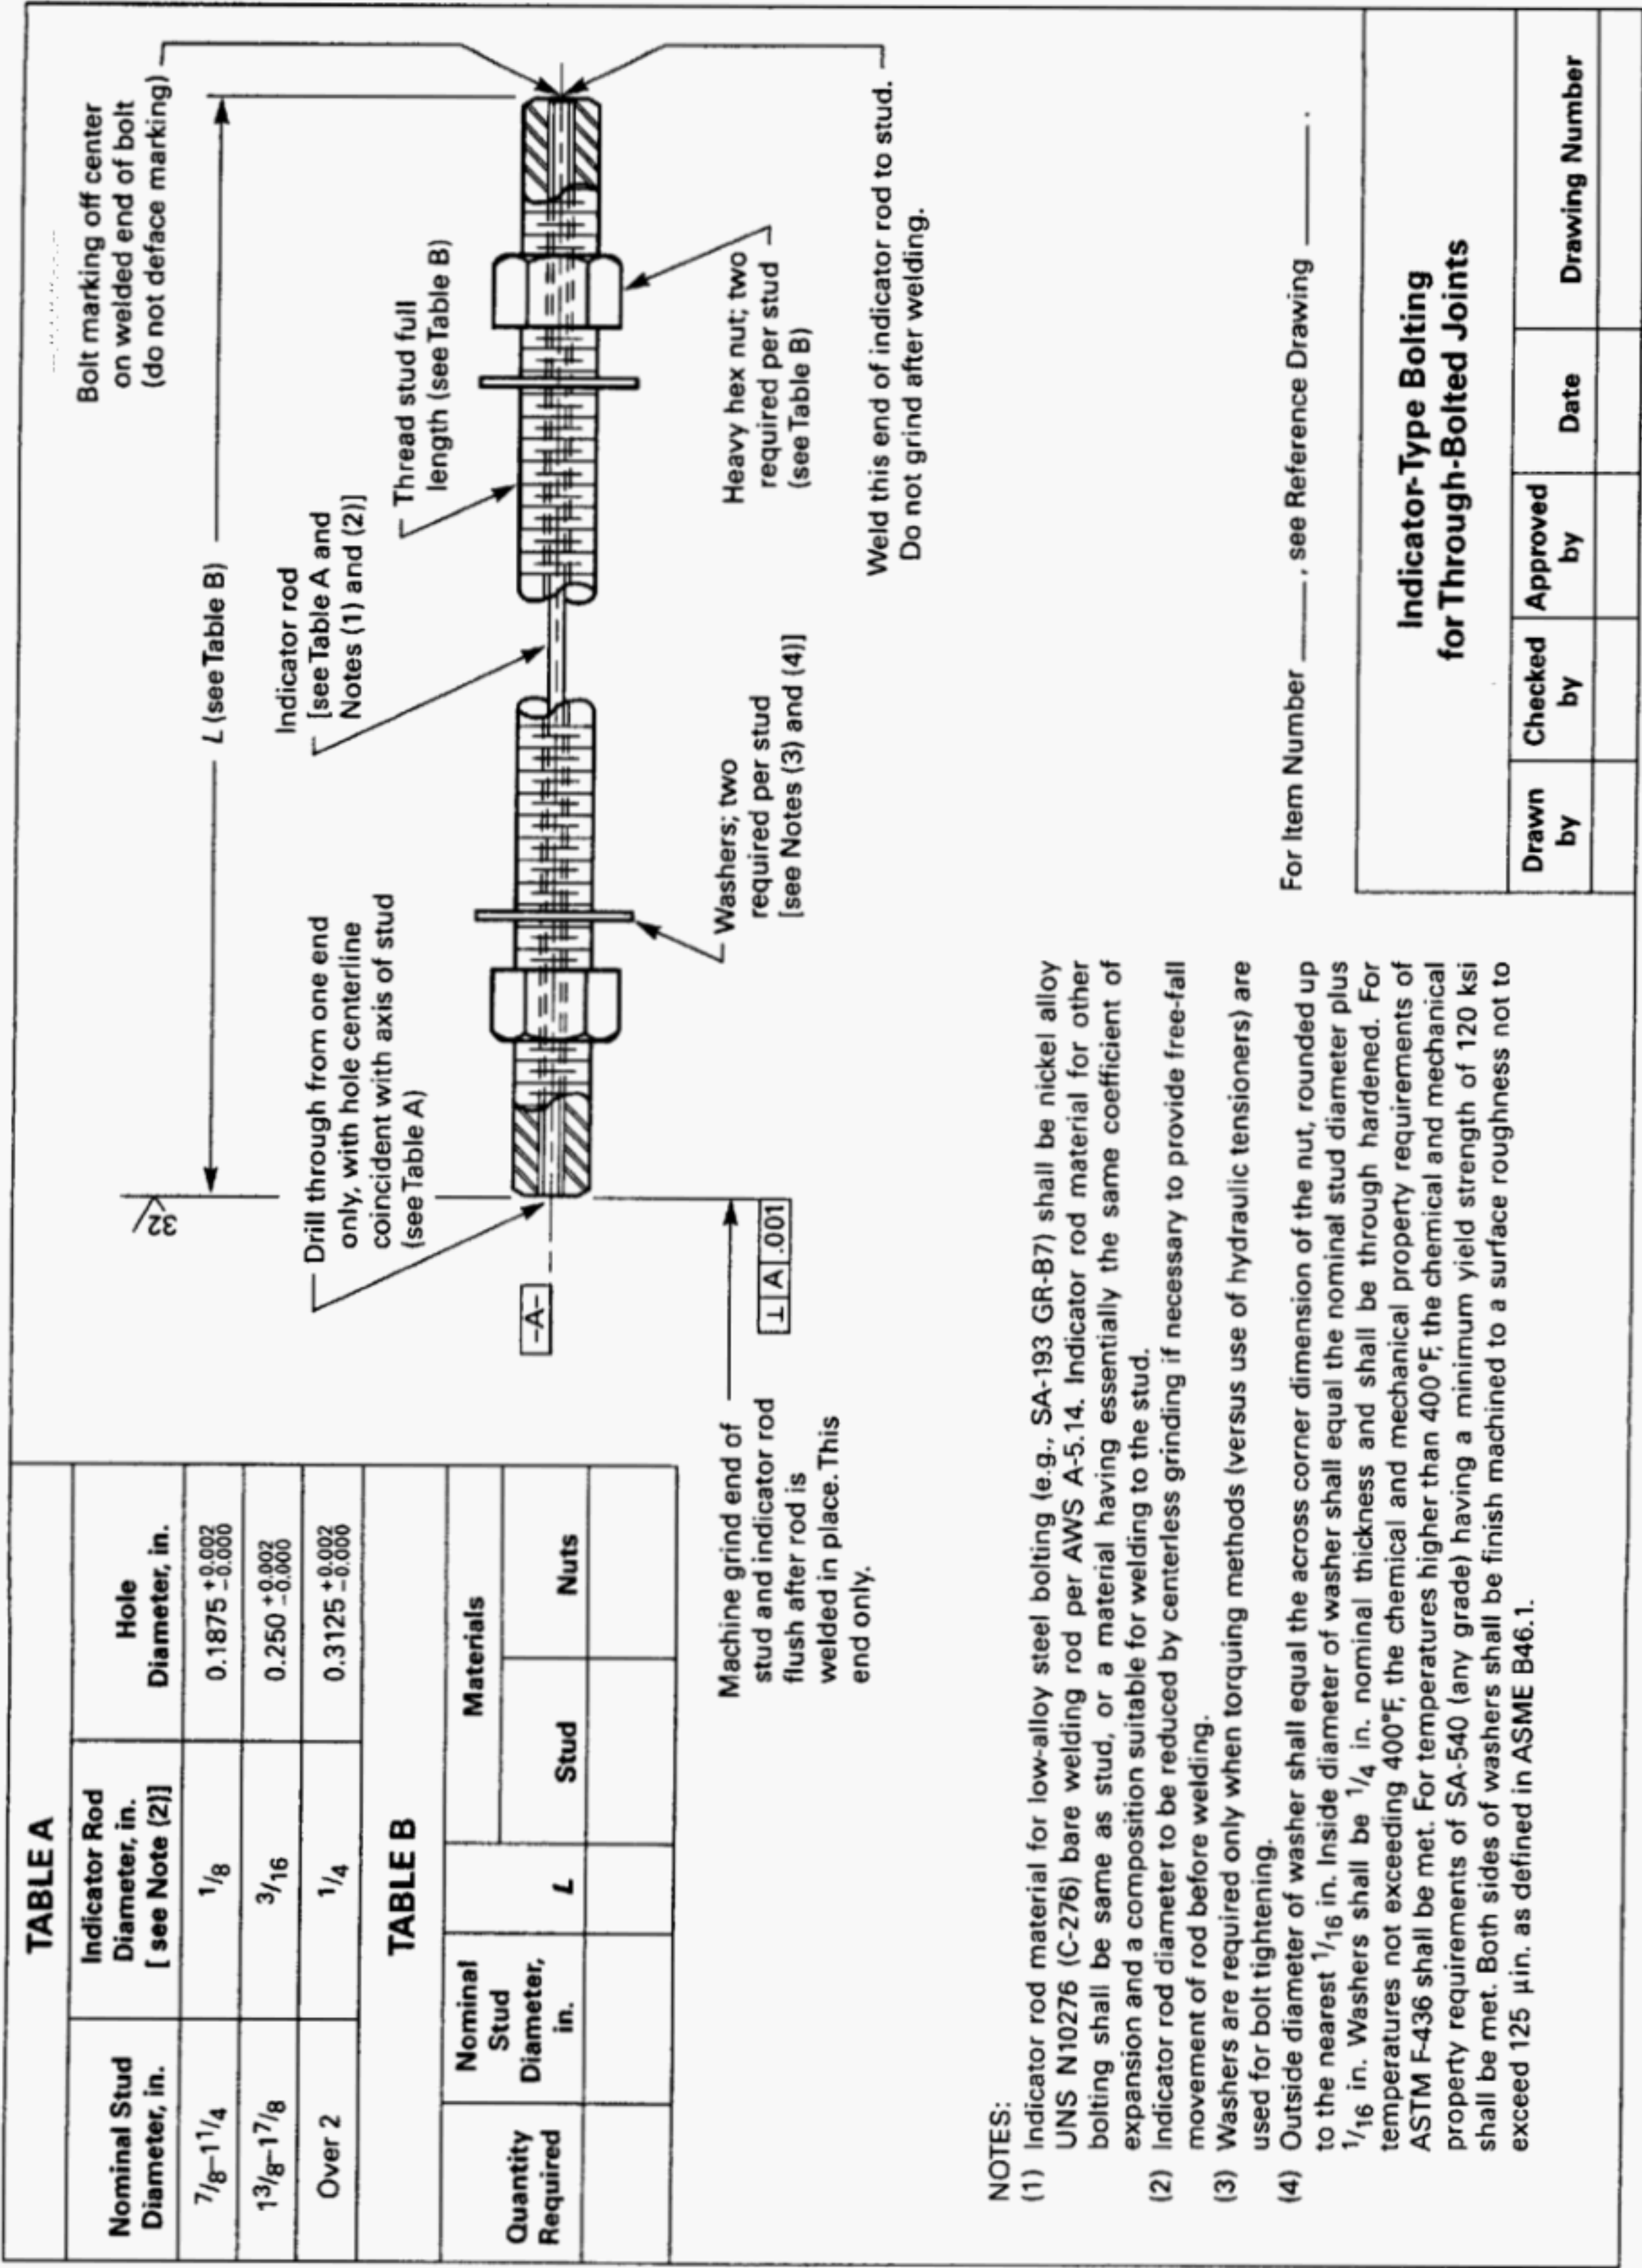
INDICATOR-TYPE BOLTING FOR THROUGH-BOLTED JOINTS
